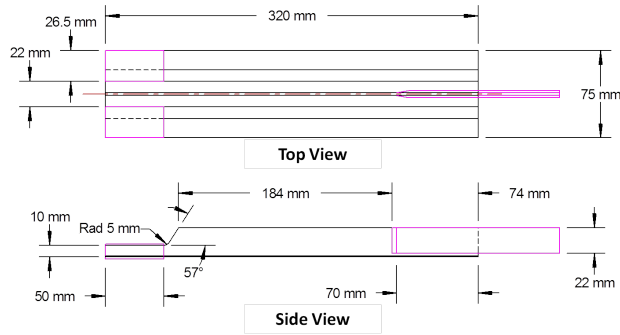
STIFFENED PANEL SPECIMEN TYPE A
